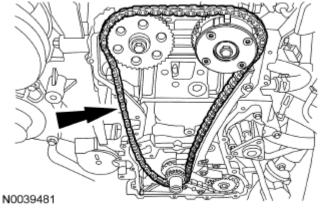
Locating Timing Chain Courtesy of FORD MOTOR CO.
